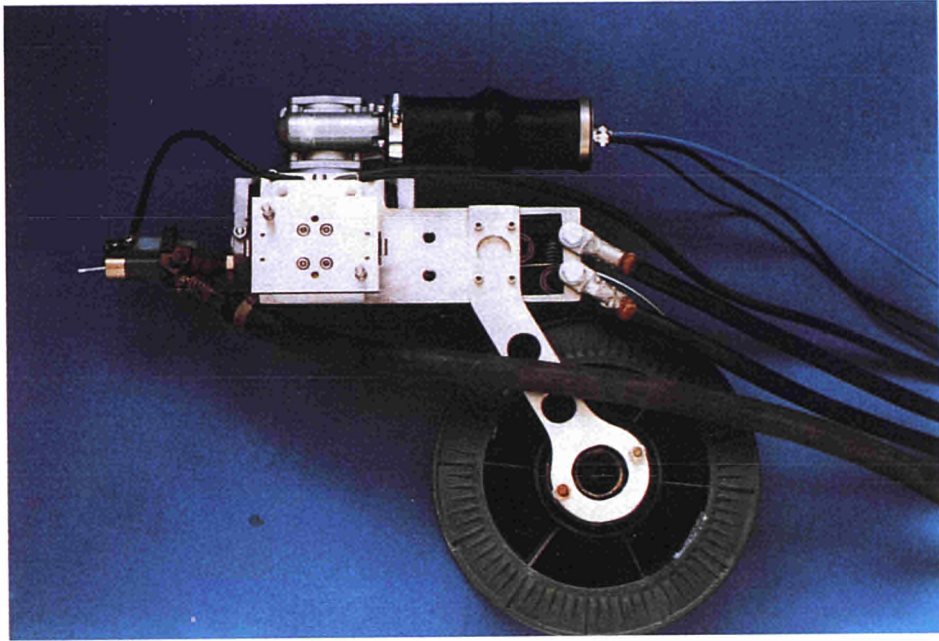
Consumable electrode tool, including torch body with wire cutting system, motor, gear, wire feed unit and flange, that fits to the Cadarache manipulator
